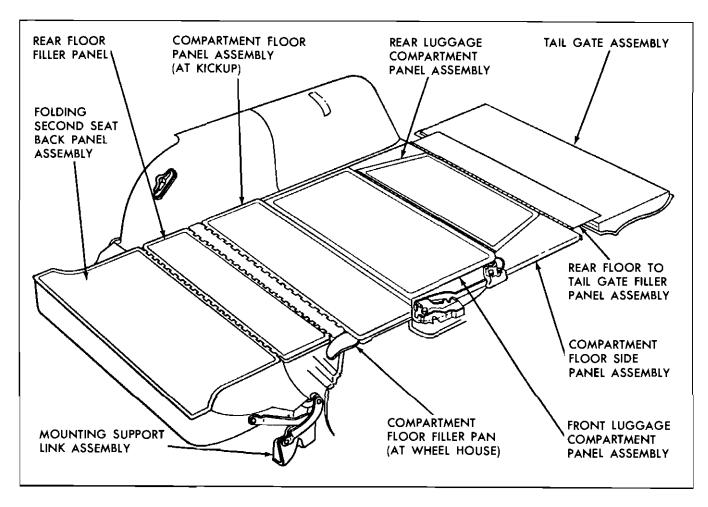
Folding Sect and Rear Compartment Panels-6 Pass.
